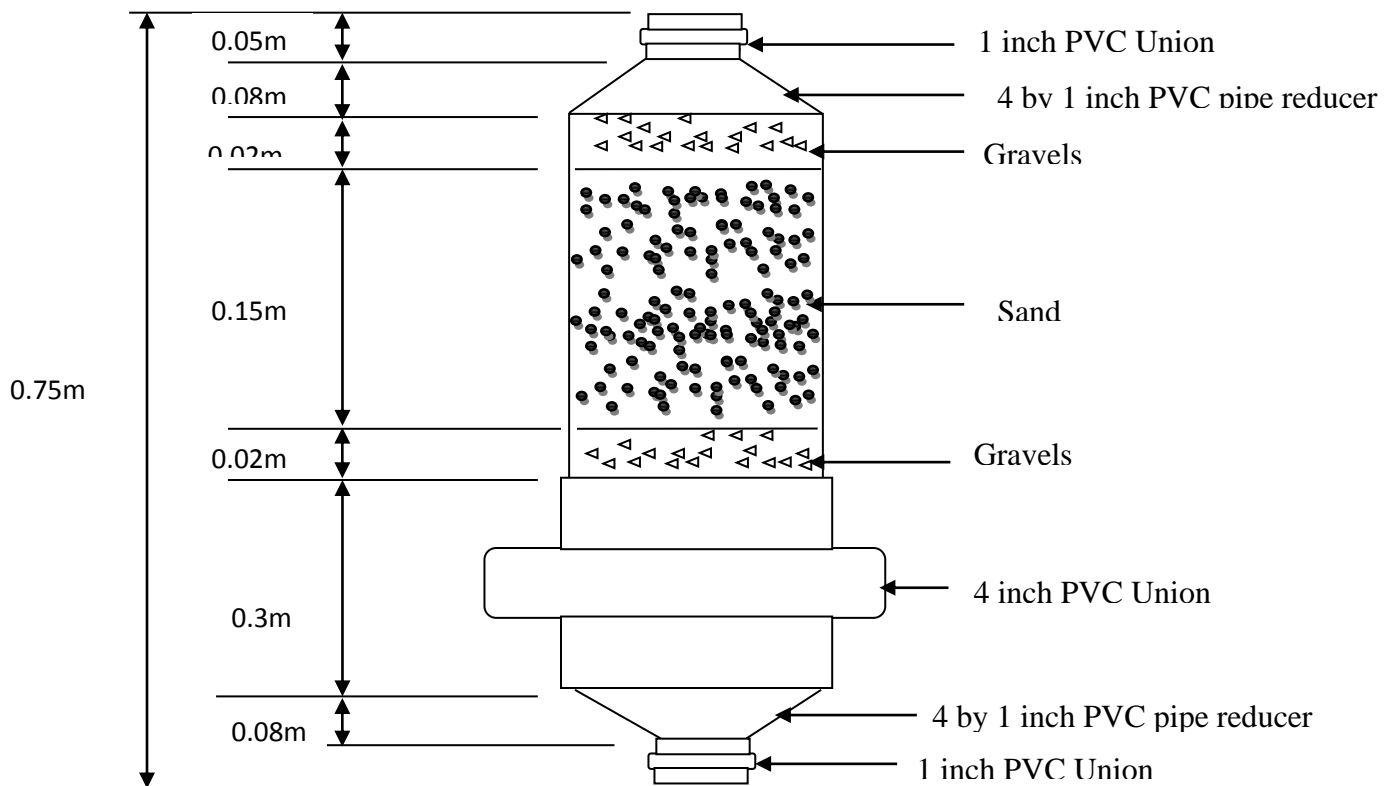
The design drawing of the Portable Tubular Filter Pipe
